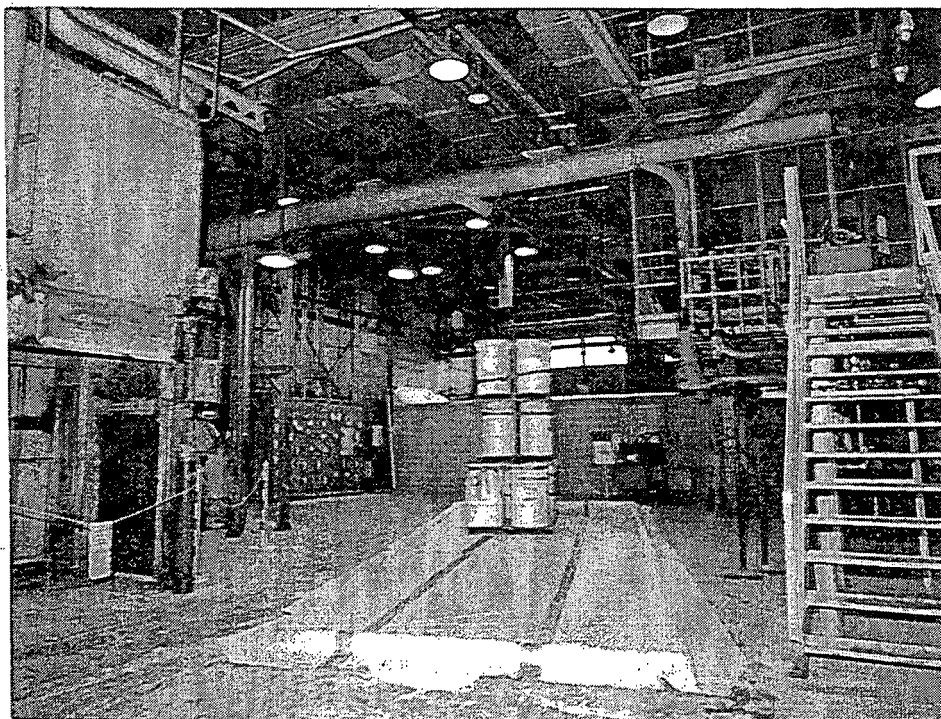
Building 9A - Uranium Casting/Ingot Processing Area, Facing South
